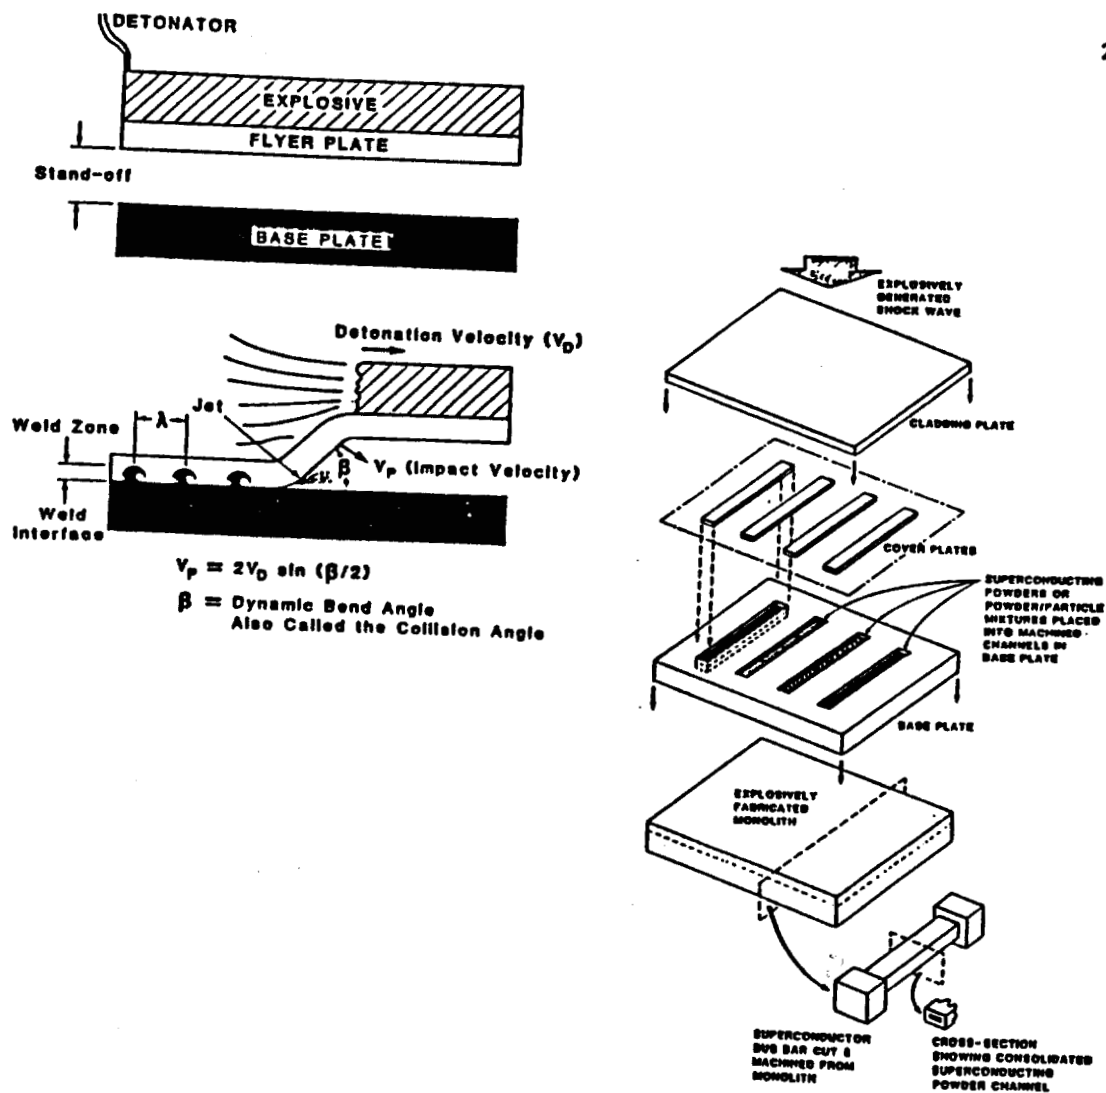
Arrangement of the superconducting metal matrix for explosive fabrication, plate welding and superconductor consolidation.
